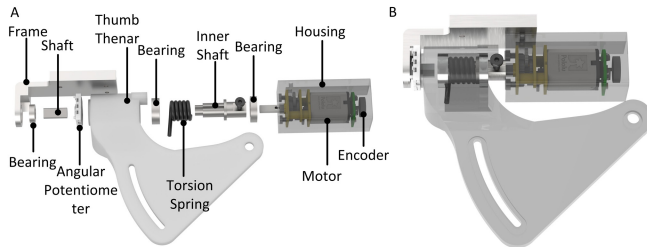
Design of RSEA for thumb thenar: (A) Exploded view of the RSEA, (B) Perspective view of the RSEA.
